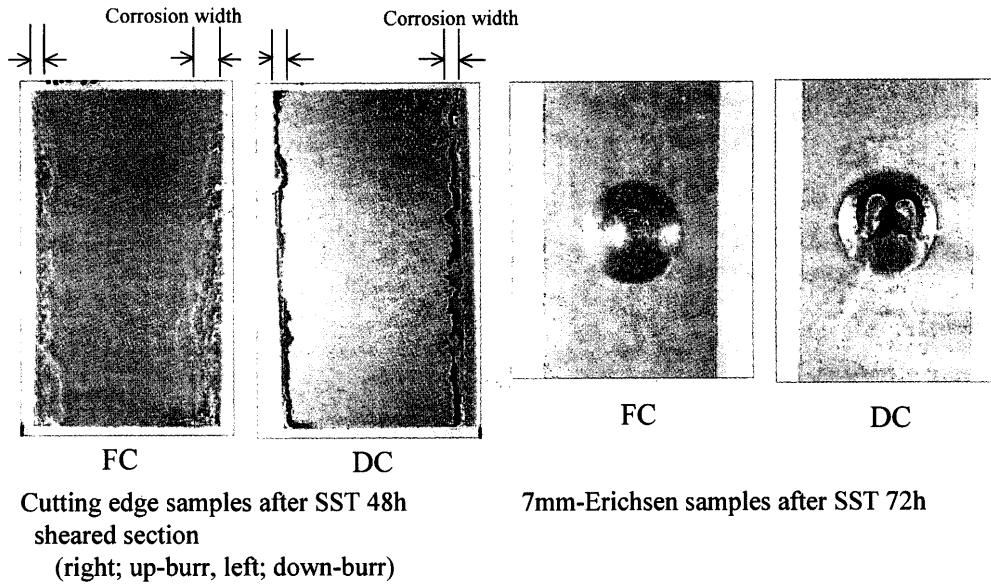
Appearances of cutting edge samples and Erichsen samples after SST.
